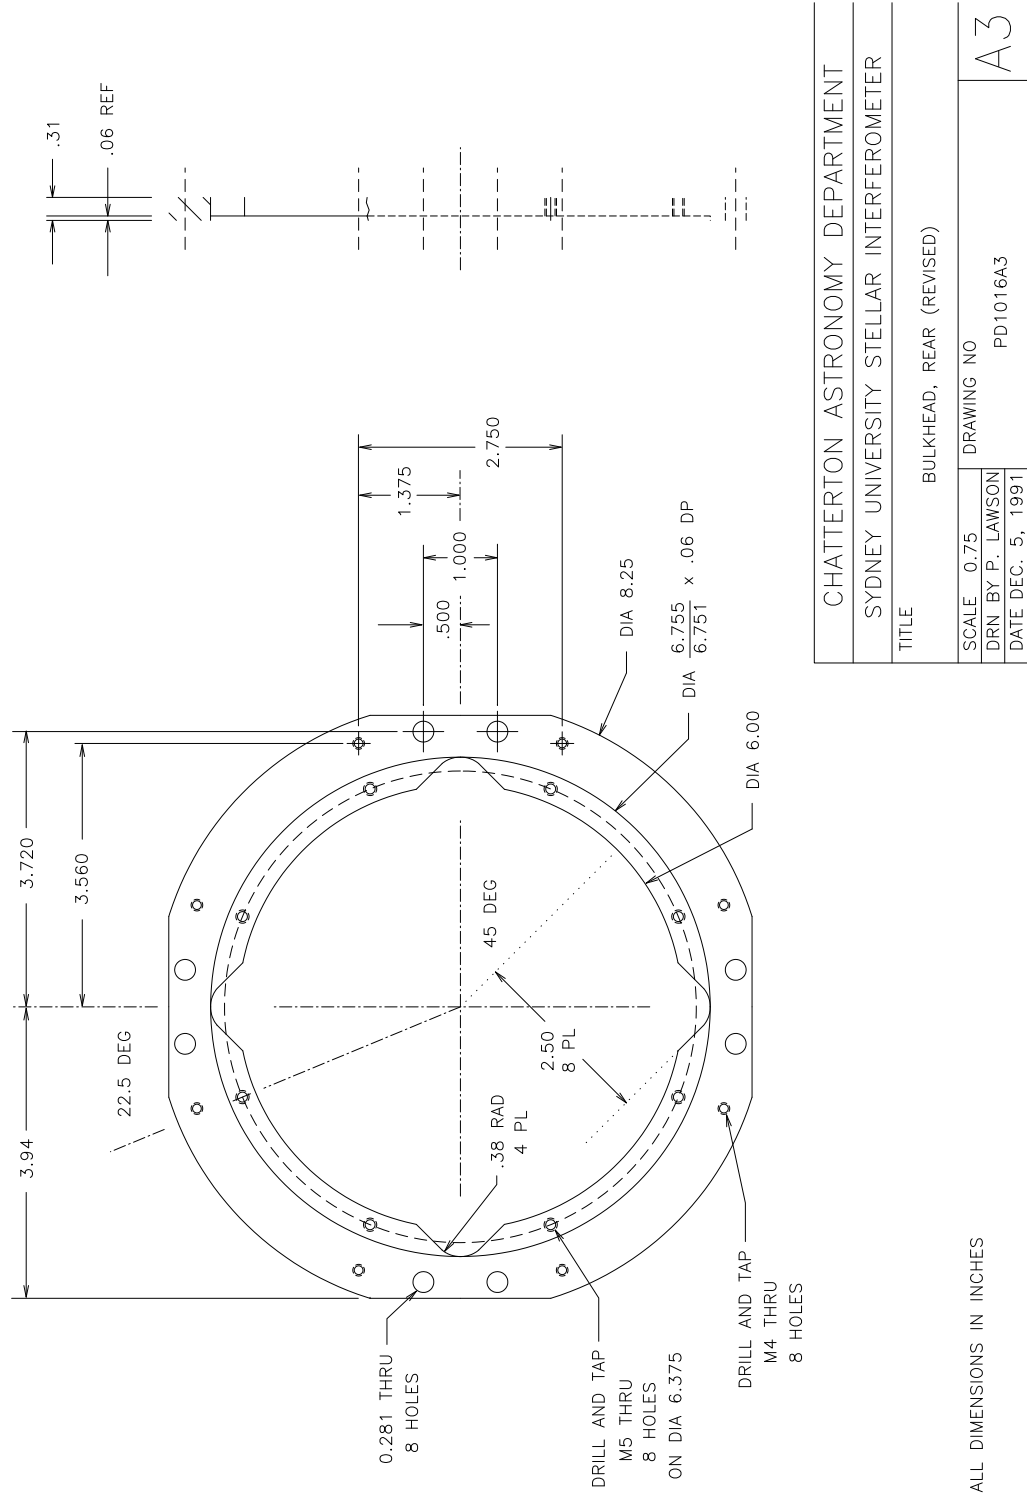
The mounting plate for the lens-mask assembly. The support plate for the mask fits into the center of this piece.
